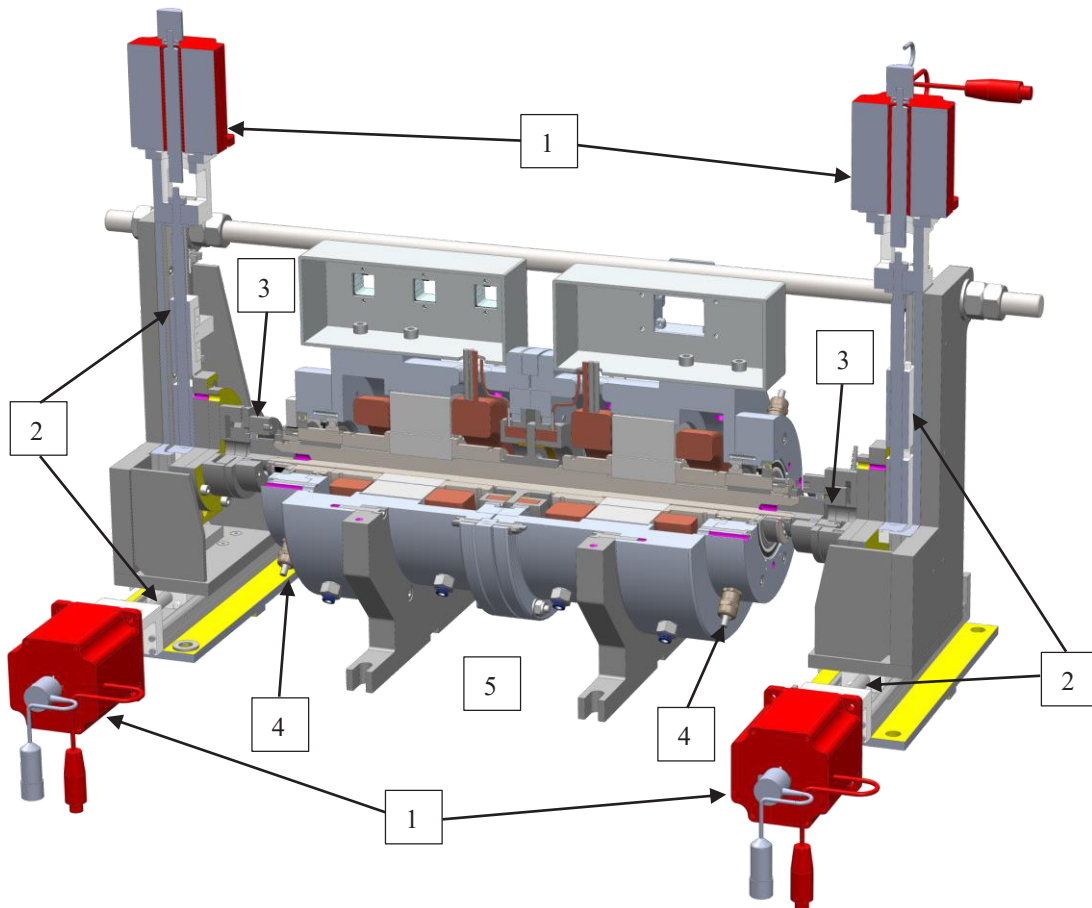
Cutaway drawing of the identification platform. Main components: (1) Stepper motor, (2) Linear track, (3) Force sensor, (4) Position sensor, (5) Bearingless machine under identification process.
